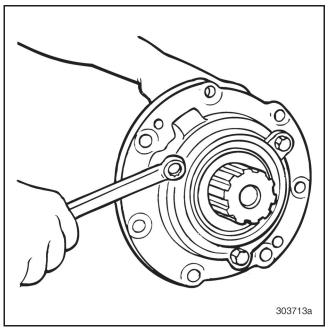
Removing Bearing Retainer Seal Housing Capscrews
